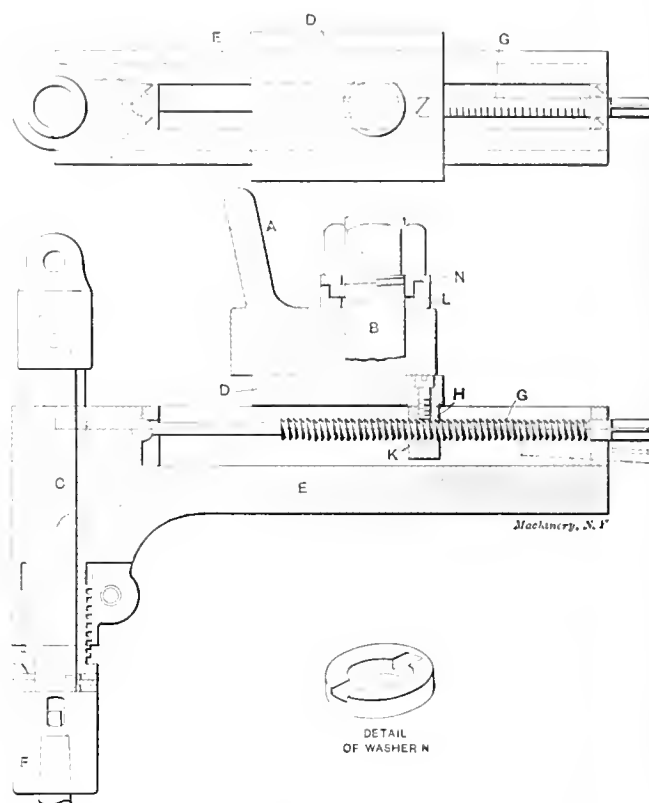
Details of Bocorselski's Device for Rapid Adjustment of Multiple Drill Spindles.
